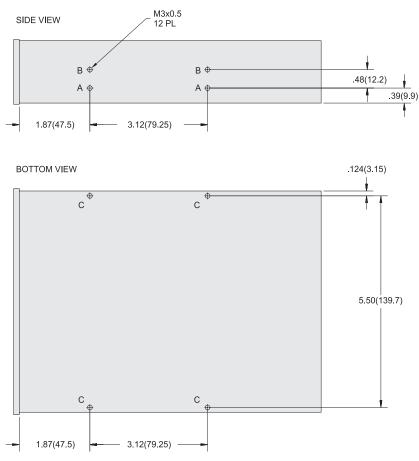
Mounting hole dimensions in inches (and millimeters)
